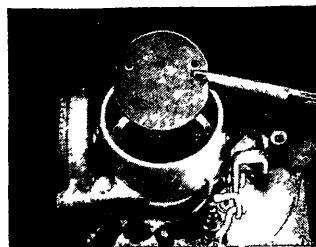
Install choke valve. Use new screws. Center valve by tapping lightly. Hold in place with finger before tightening screws
